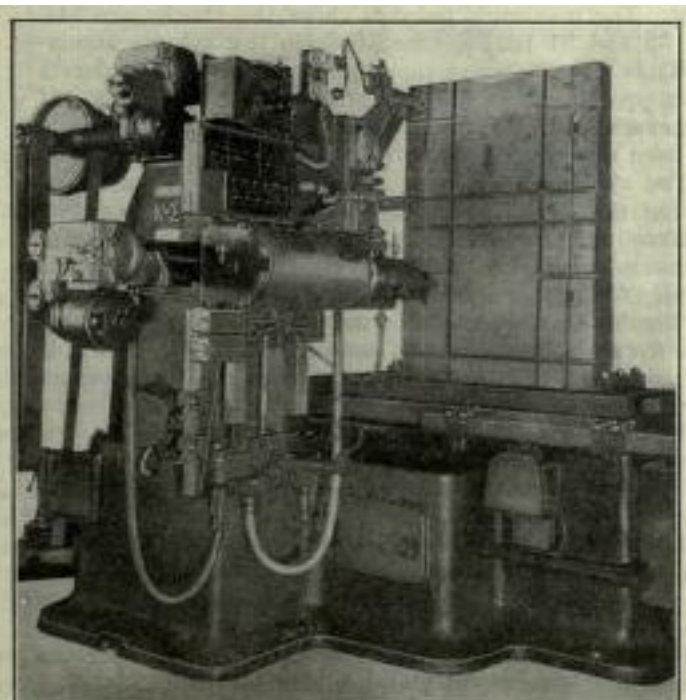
KELLER TYPE F DIE-SINKING MACHINE
